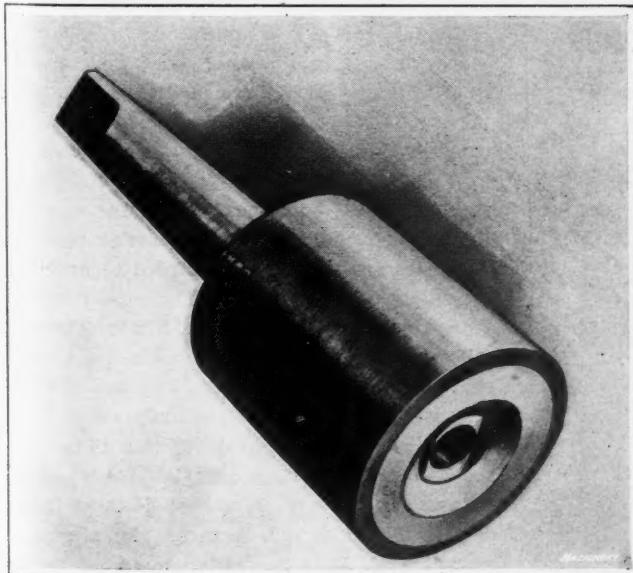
Drill Chuck made by Progressive Machine & Metal Products Co.
